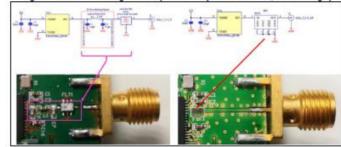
Detail of PCB layout for the SMPS part (UFQFPN48 left, VFQFPN68 right)
